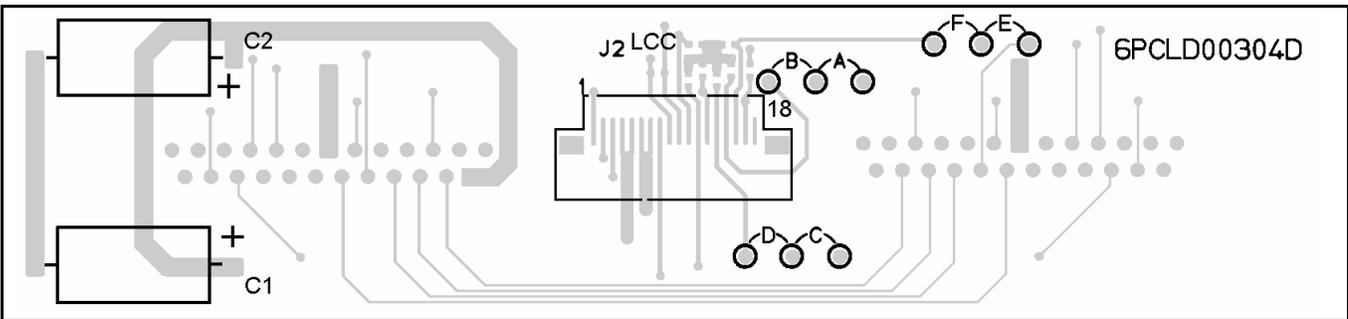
Remote Interface Adaptor NQZ-4882C Solder Side
